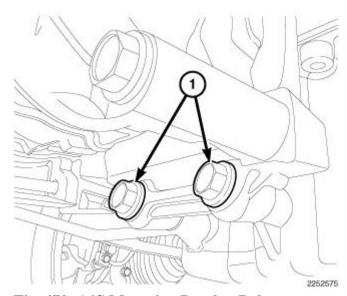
A/C Mounting Bracket Bolts Courtesy of CHRYSLER LLC
